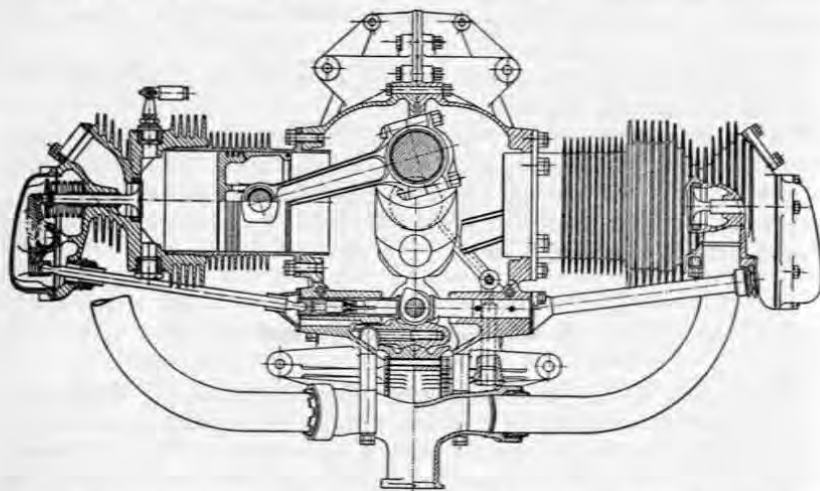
Transverse section of the four-cylinder Continental aircraft engine, bore 98.4 mm, stroke 95.25 mm. Note the hydraulic tappets for the automatic maintenance of valve clearance.
